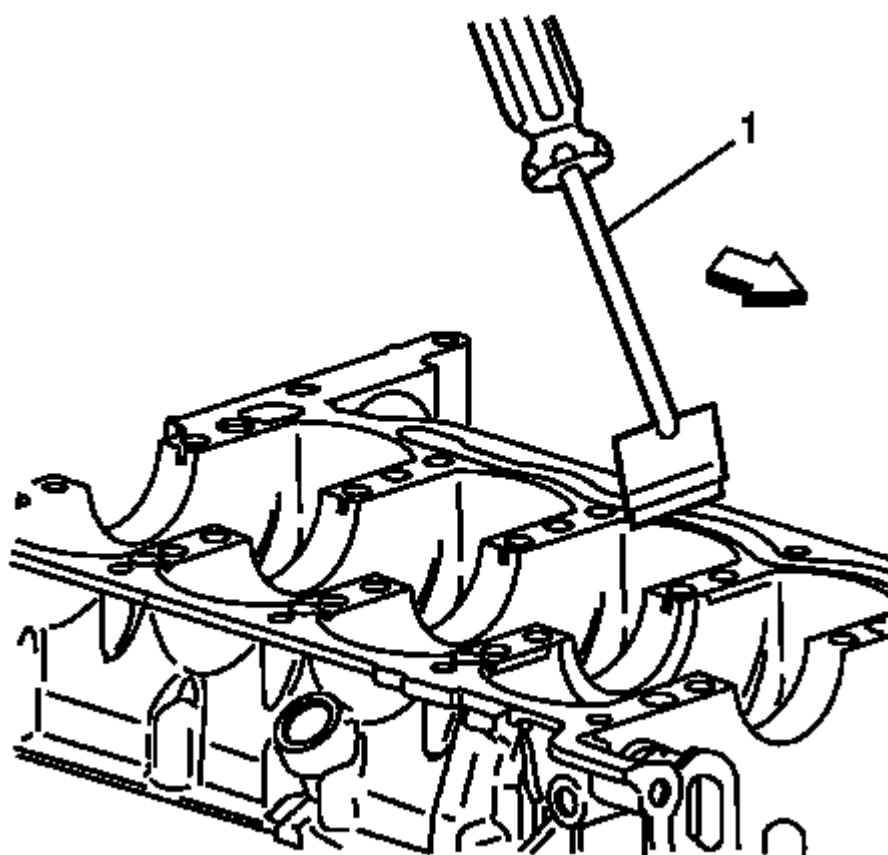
Clean Sealing Material From Gasket Mating Surfaces On Lower Crankcase Engine Block Side With Suitable Tool
